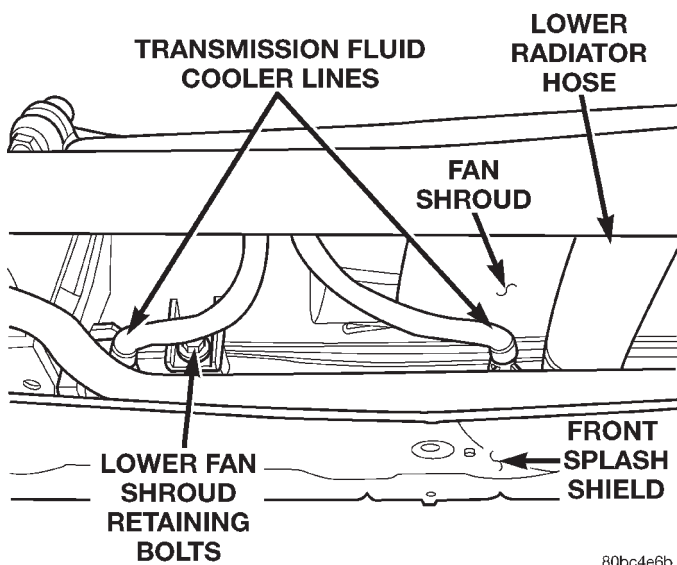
Transmission Fluid Cooler Lines At Radiator
